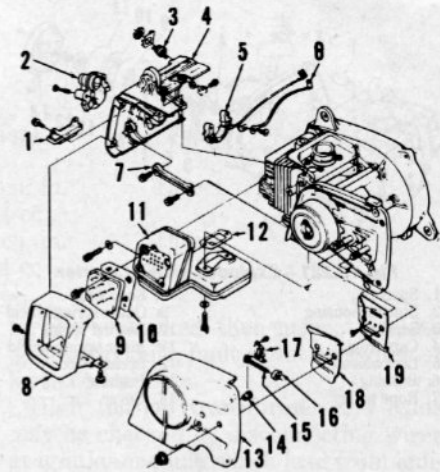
Exploded view of exhaust and chain tensioning assemblies.
